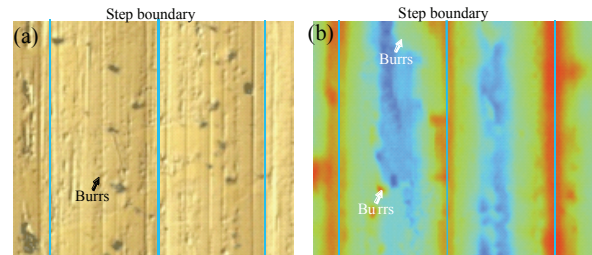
Burrs formed on the machined surface inspected by (a) Olympus BX60 microscope and (b) Wyko NT 8000 microscope
